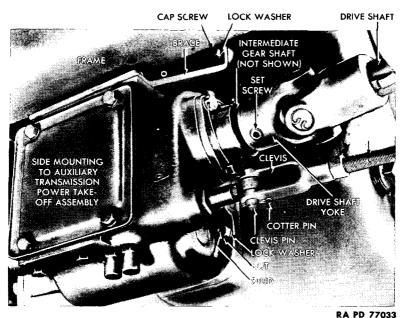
Side Mounting to Auxiliary Transmission Power Take-off Assembly
